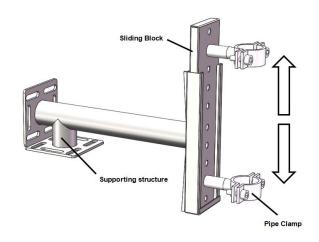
MA-120-C Submersion Adapter Mounting Bracket
